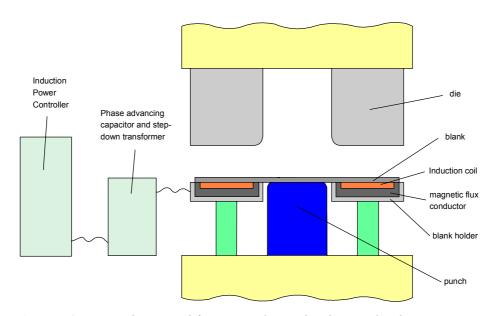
Warm sheet metal forming with Localized In-Tool Induction Heating.
